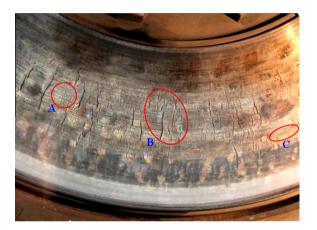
Cracks on the friction surface (A) crackle, (B) radial crack and (C) circumferential crack.
